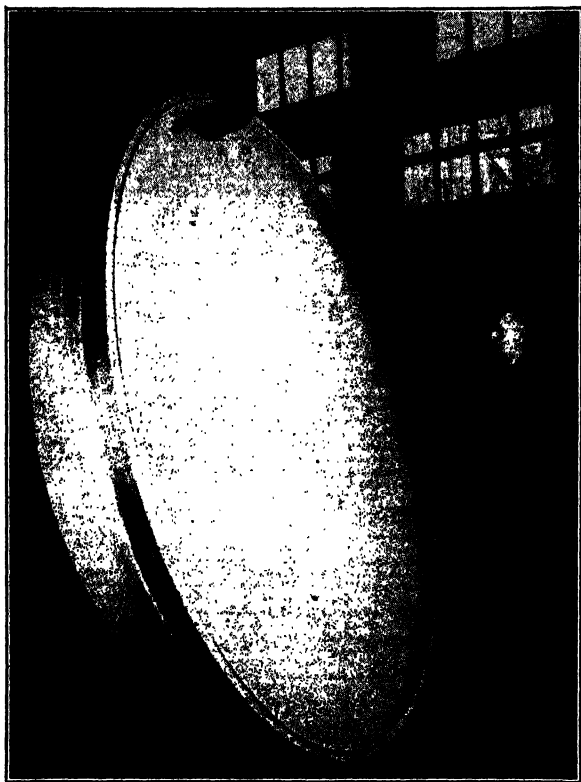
Nickel-Clad Steel Elliptical Dished Head 8 ft 8 in. Outside Diameter Weighing about 6900 lb, for Use in the Fabrication of a 4700-gal Jacketed Autoclave for Chemical Processing.
